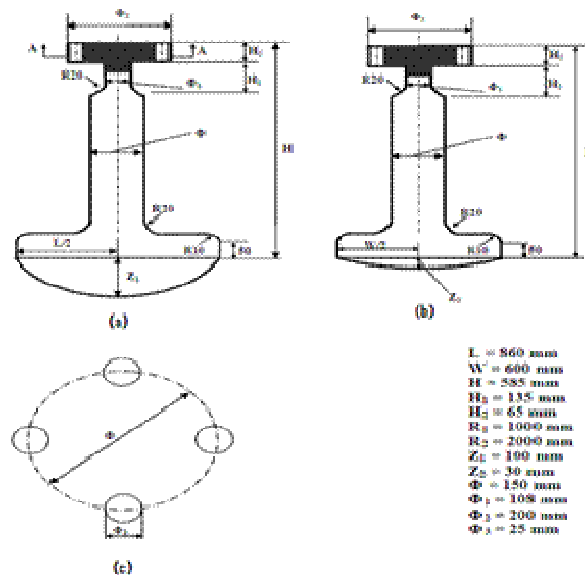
Technical drawings of the tool used (a) Front view, (b) Side view and (c) Top view
